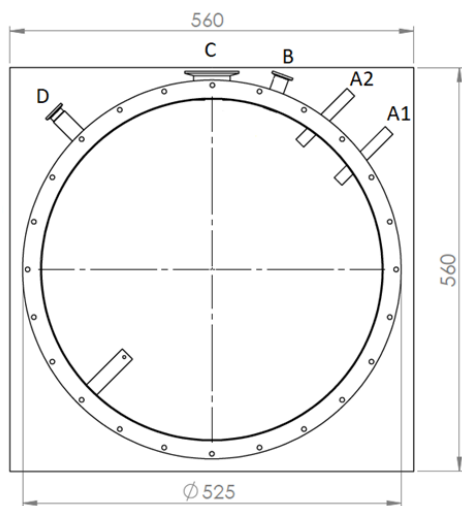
Technical drawing of the cylindrical vessel which will be used for the test chamber. The different couplings are denoted by different letters. The dimensions are in millimeters.
